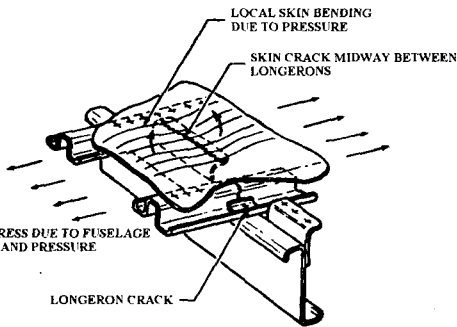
Typical fatigue crack locations in fuselage shell
